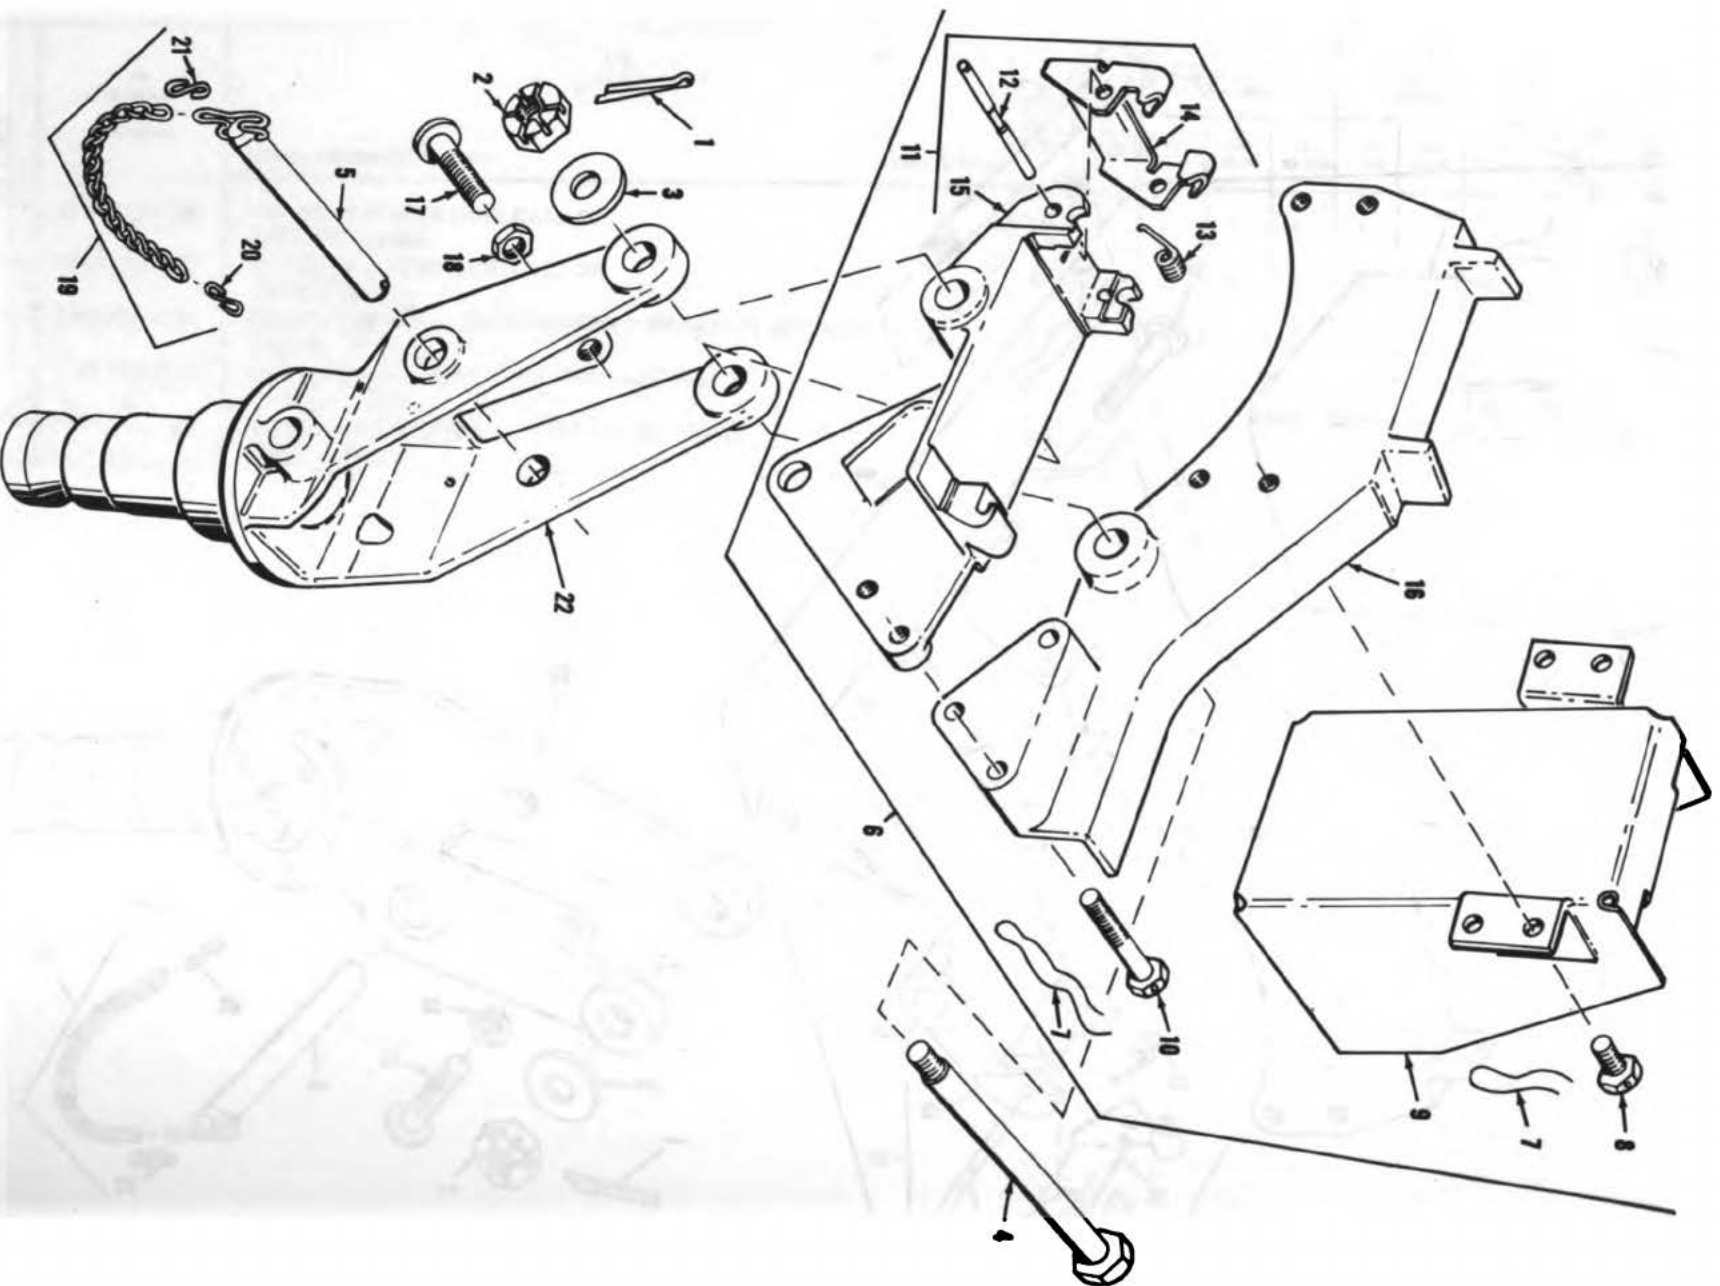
Moxet Machine gun, M112-10800915—partially exploded view.
